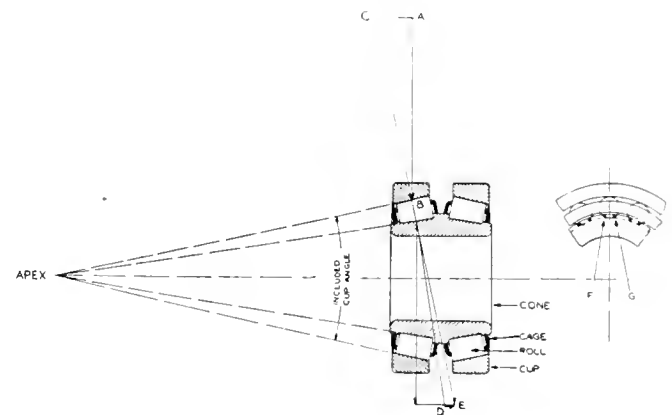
Diagram Showing Thrust and Design of Tapered Roller Bearing
